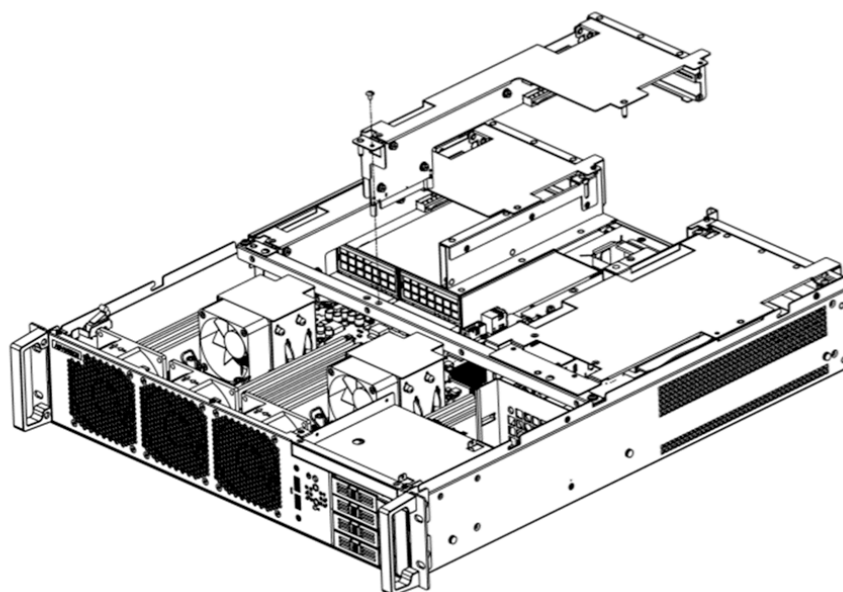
Insert Riser Cage-2 Module/ 安装 Riser Cage-2 模块 / 安装 Riser Cage-2 模组
